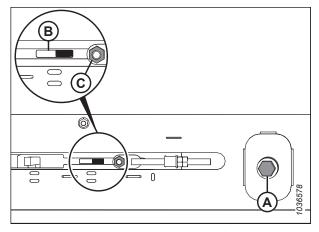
Adjusting Tensioner – Left Side Shown, Right Side Opposite
